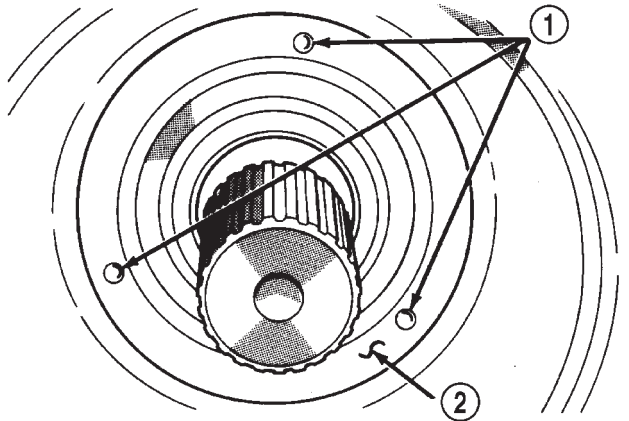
GEARTRAIN/HOUSING FIXTURE
